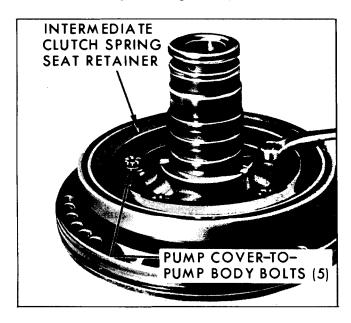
G-78 Removing Pump Cover Attaching Bolts
